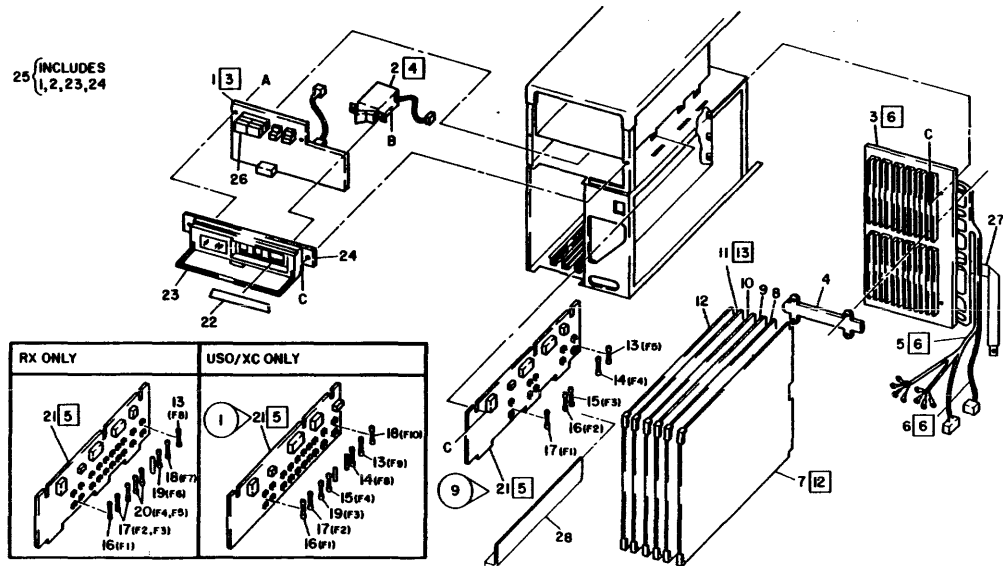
Processor Printed Wiring Assemblies (Page 2)
